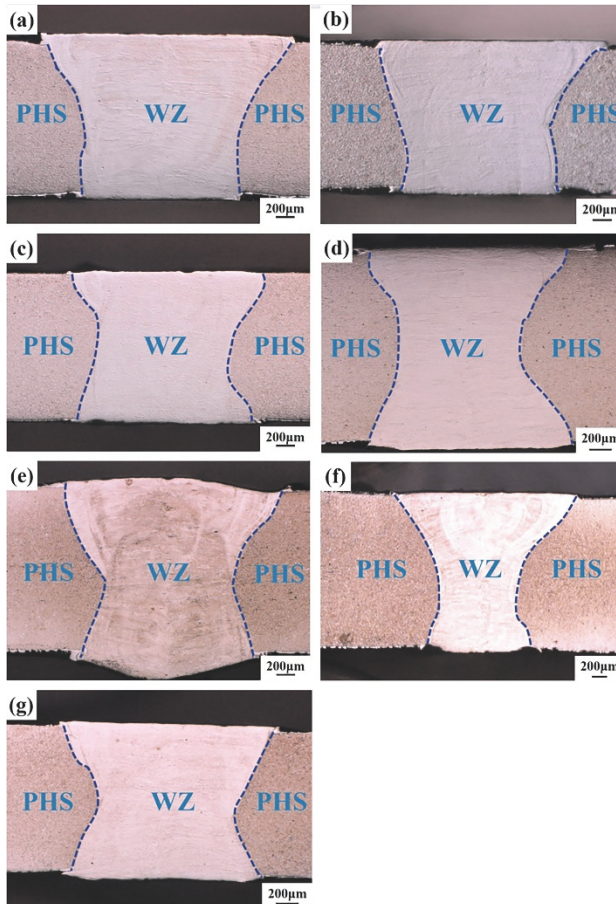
(a) Optical image of weld #1 after hot stamping (b) Optical image of weld #2 after hot stamping (c) Optical image of weld #3 after hot stamping (d) Optical image of weld #4 after hot stamping (e) Optical image of weld #5 after hot stamping (f) Optical image of weld #6 after hot stamping (g) Optical image of weld #7 after hot stamping.
